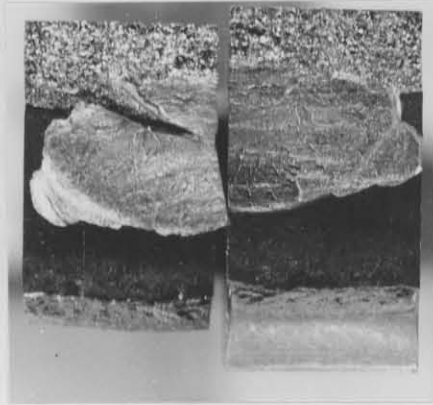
Brittle cleavage delamination fracture in a fractured 308L welded FLNFT specimen. The delamination fracture was initiated by the cleavage fracture (bright fracture surface) in the coarse grained HT HAZ.
